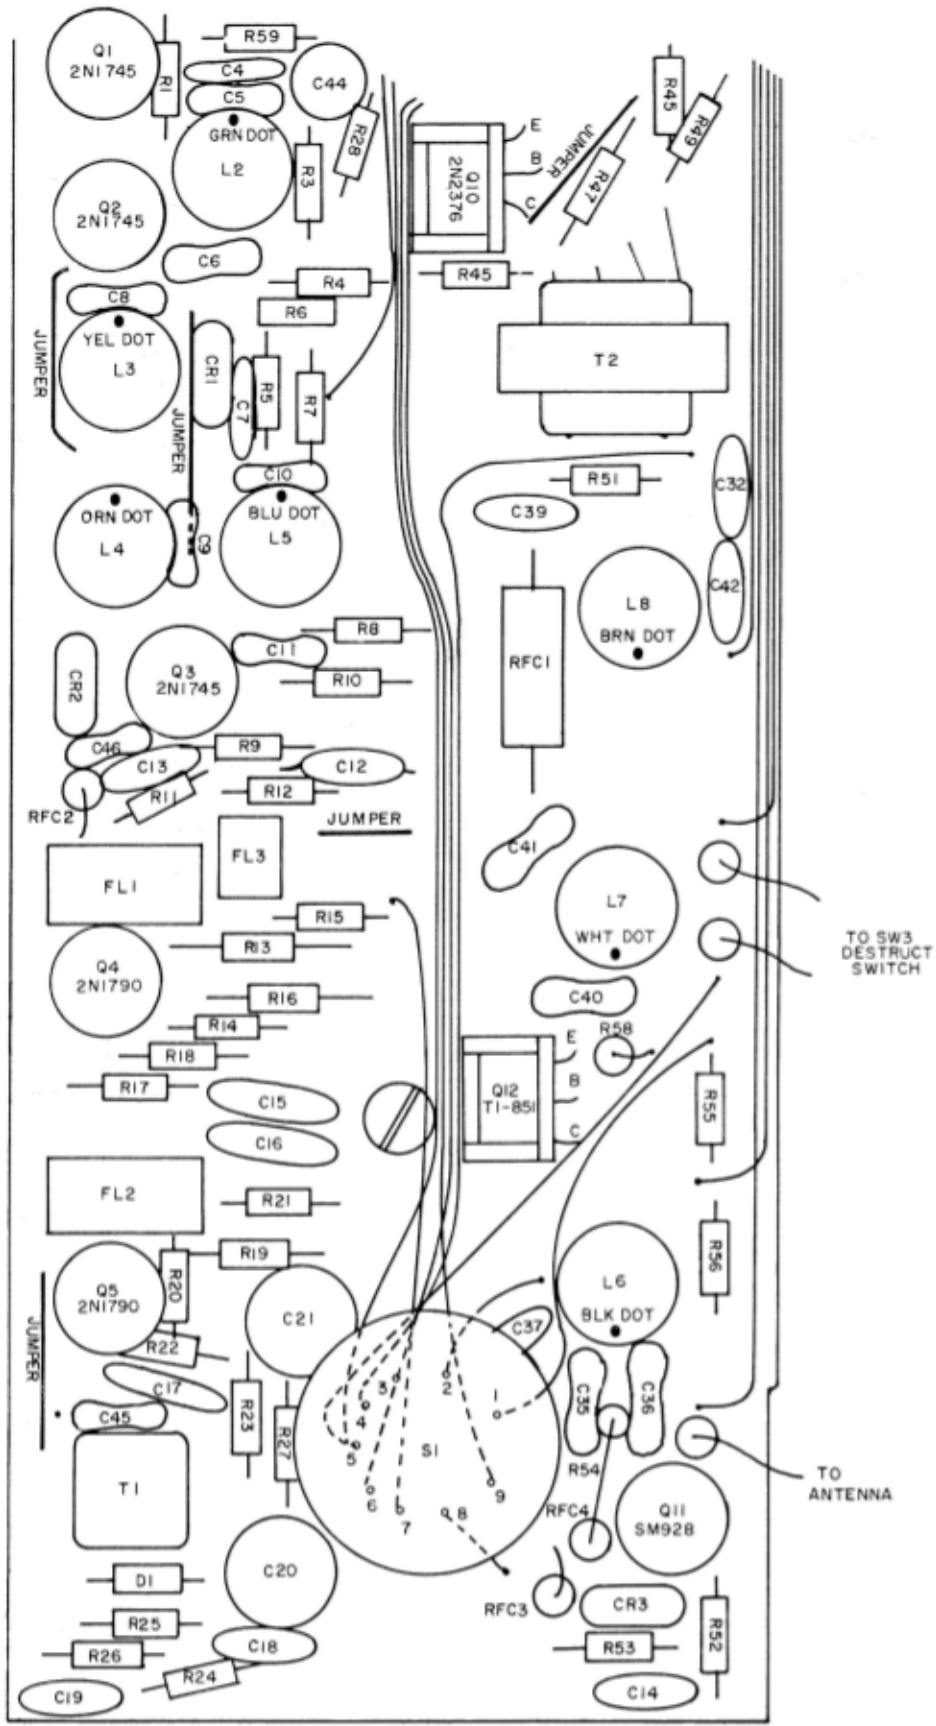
(Sheet 2 of 2) Model HT-1A, Printed Circuit Board Component Identification
